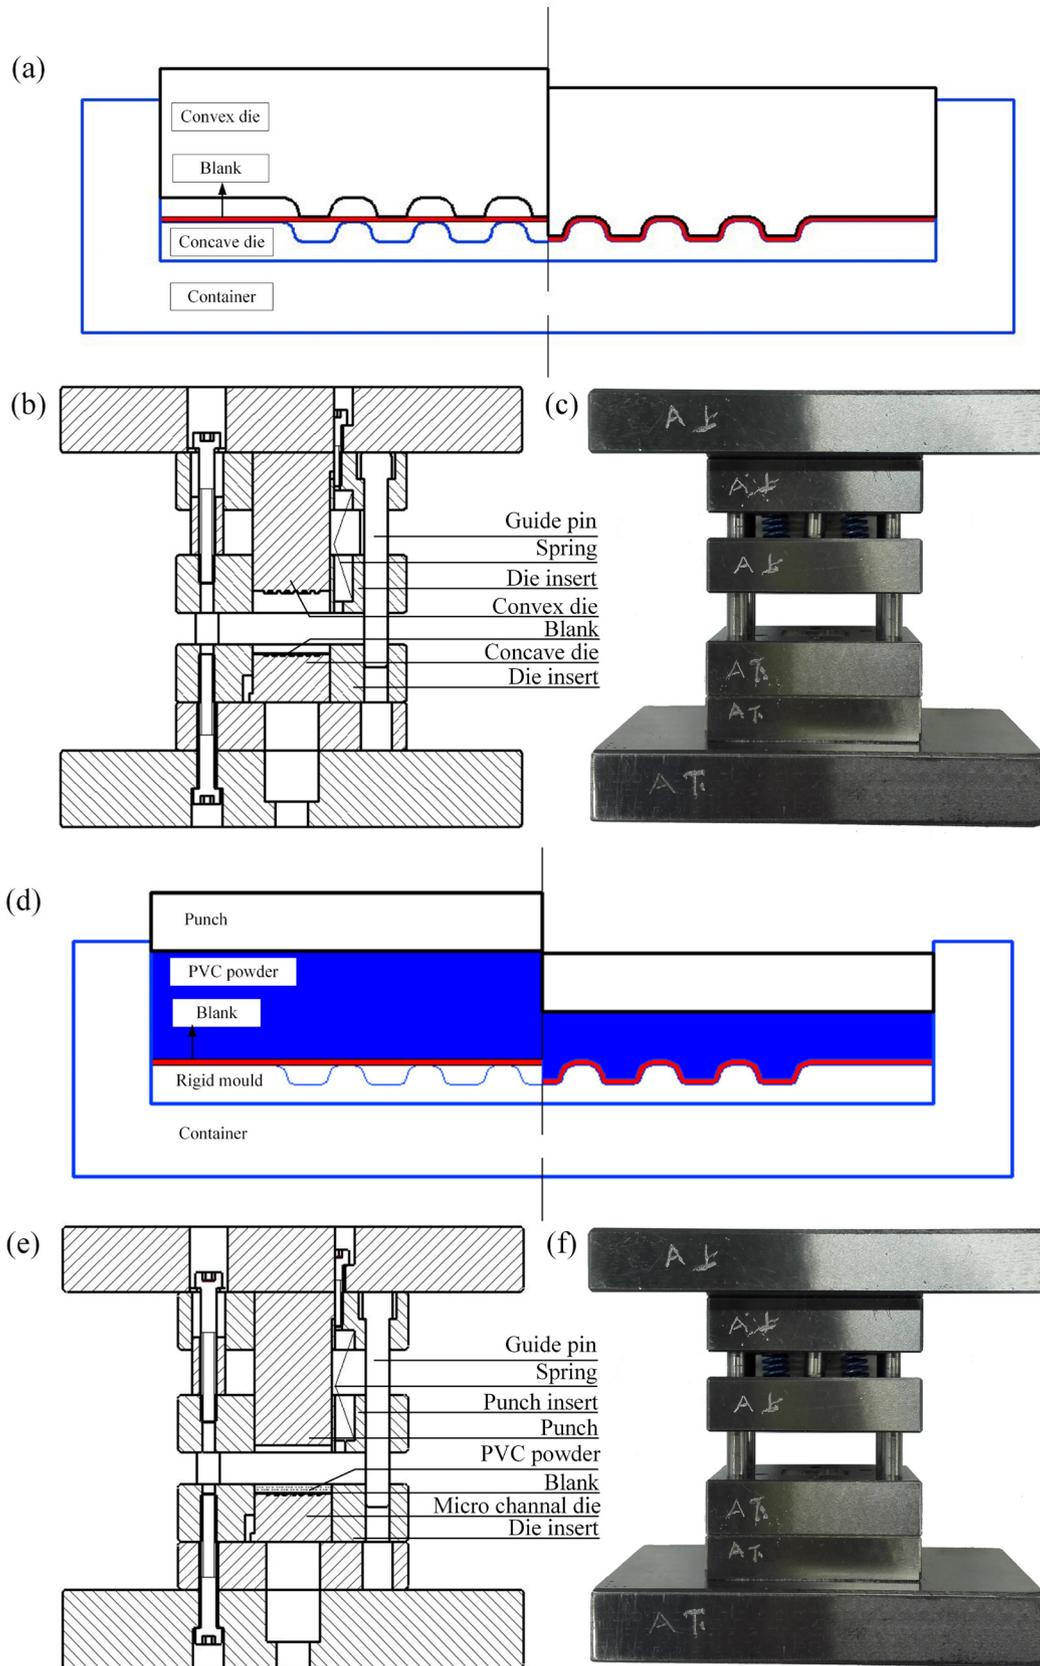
Forming process and mold: (a) Schematic of rigid die forming process; (b) Schematic of rigid die forming mold; (c) Photograph of rigid die forming mold; (d) Schematic of the PPF process; (e) Schematic of the PPF mold; (f) Photograph of the PPF mold.
